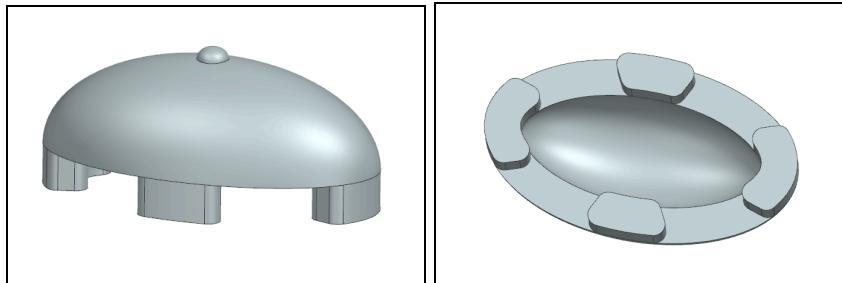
CAD model of beret with right showcasing the 4 tabs for force assembly.
